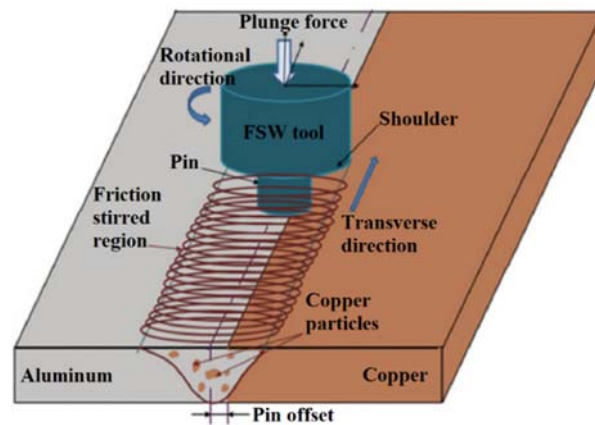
Figure A. Process principle of dissimilar Friction Stir Welding (FSW)
